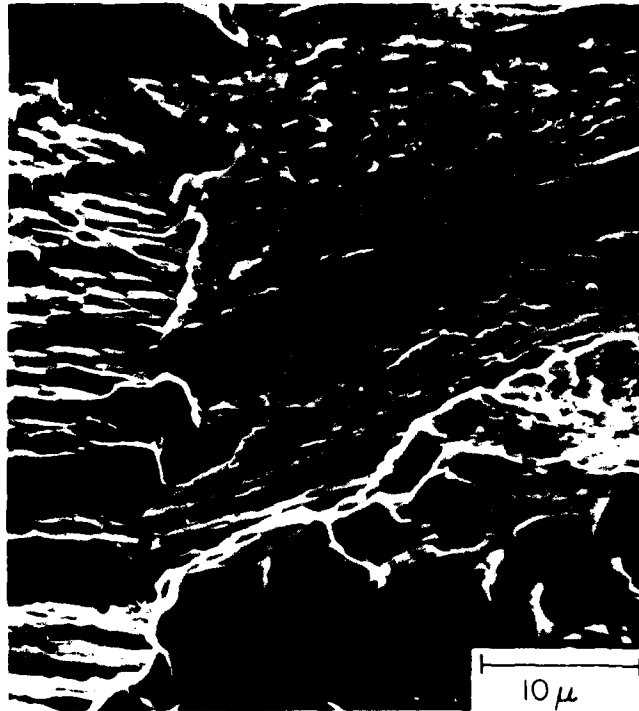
Fracture surface of Al 7075-T73 alloy tested in 0.1M NaCl
